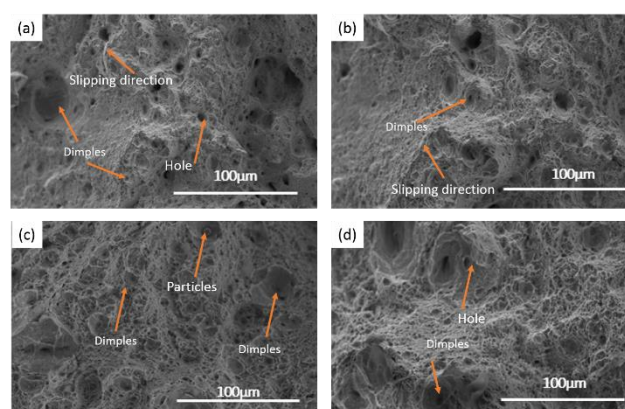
tensile fracture morphology of printed samples under different laser power (a): 270W (b) 300W (c) 320W (d) 360W
